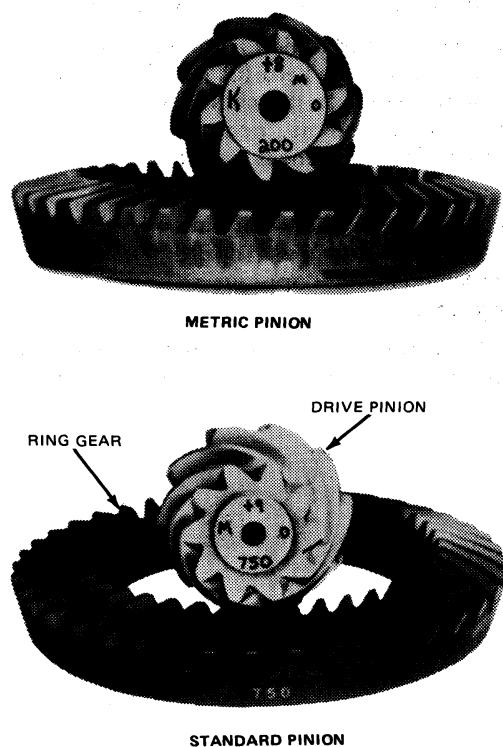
Ring Gear and Drive Pinion—Standard and Metric
